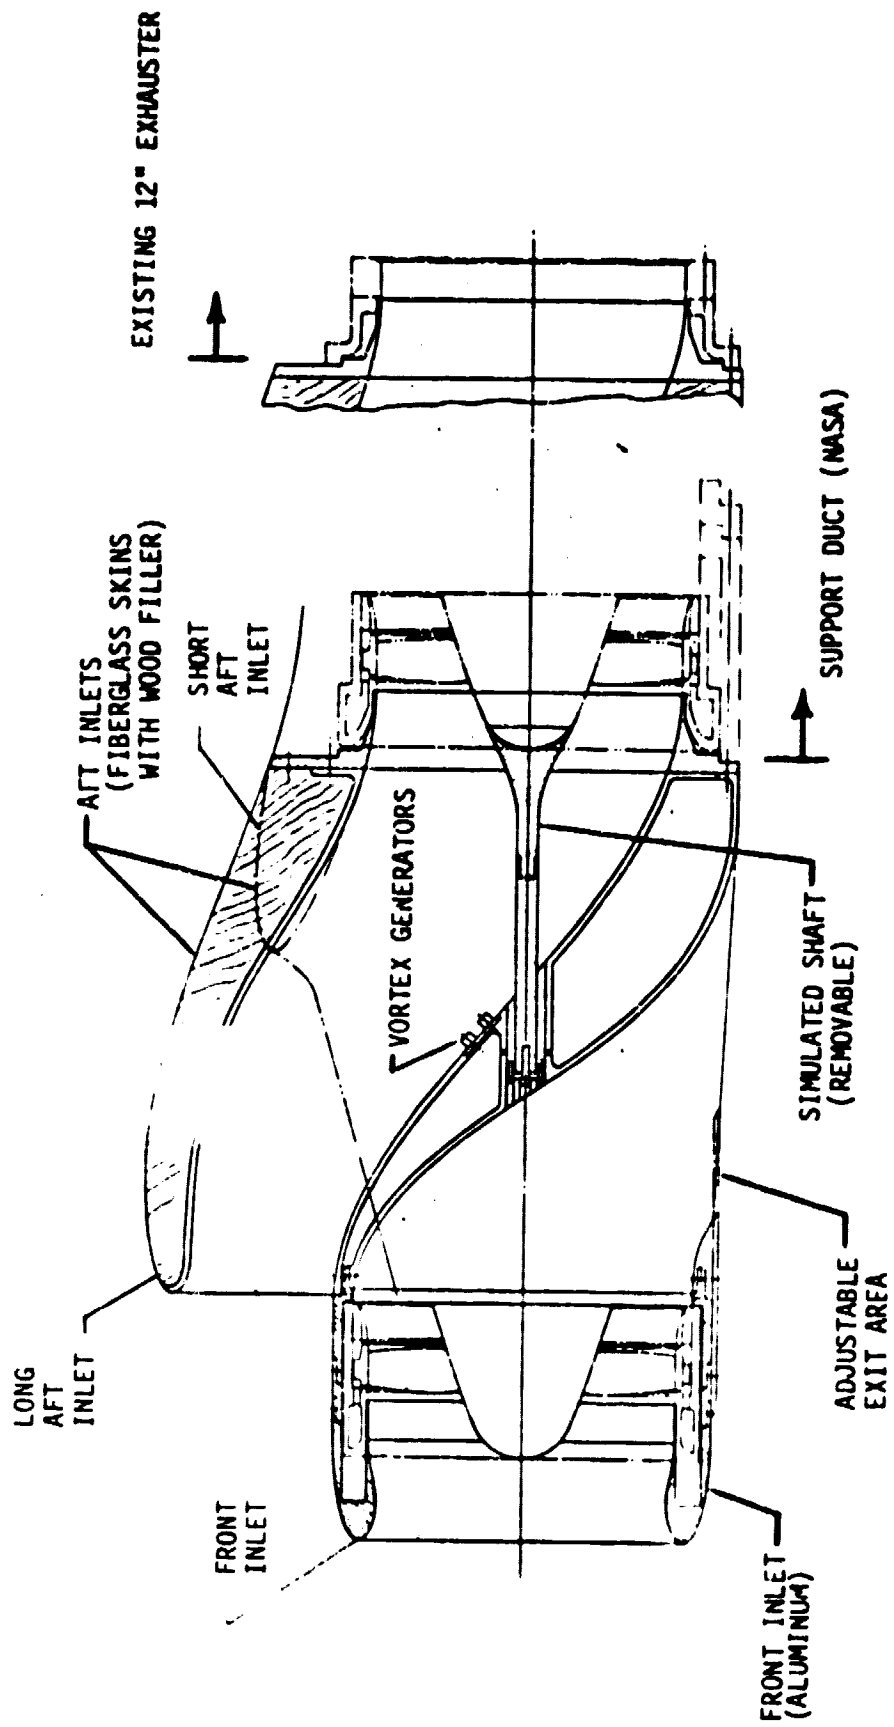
TANDEM FAN COMBINED INLET MODEL ASSEMBLY.
